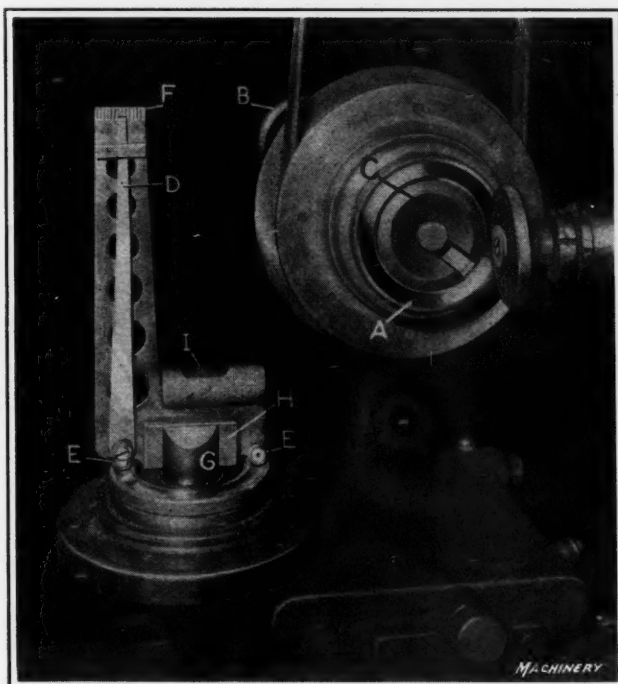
Radial Grinder and Gage for grinding and testing Raceways of Ball Thrust Bearings
